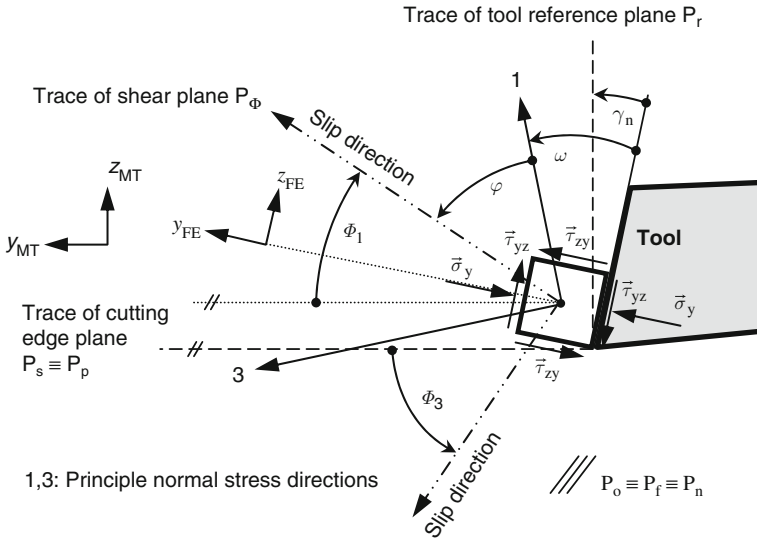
Surface element at the cutting part, acc. to HUCKS [Huck51]
